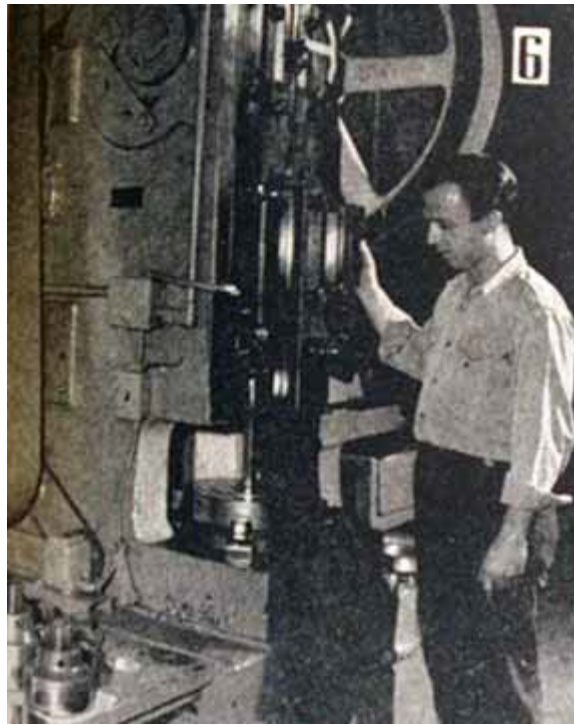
Cupping and drawing press for making gold filled tubes or wire. From Jewelry, September 1953.
